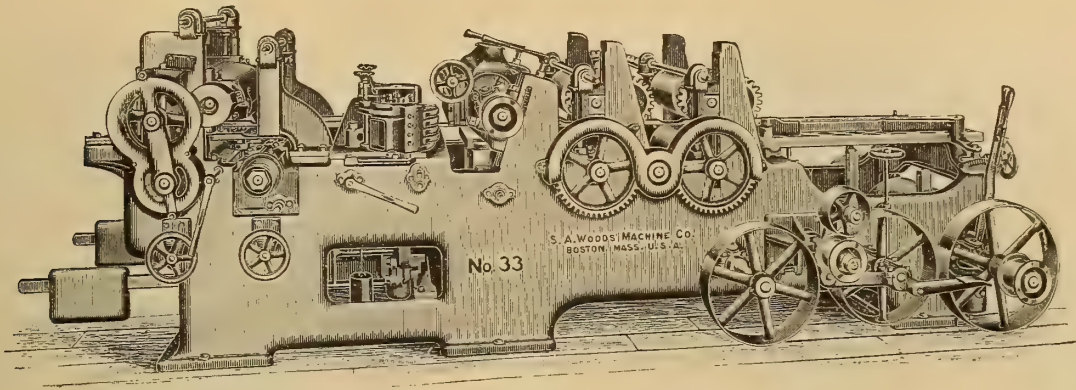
FOUR-HEAD FLOORING MACHINE, No. 33.
